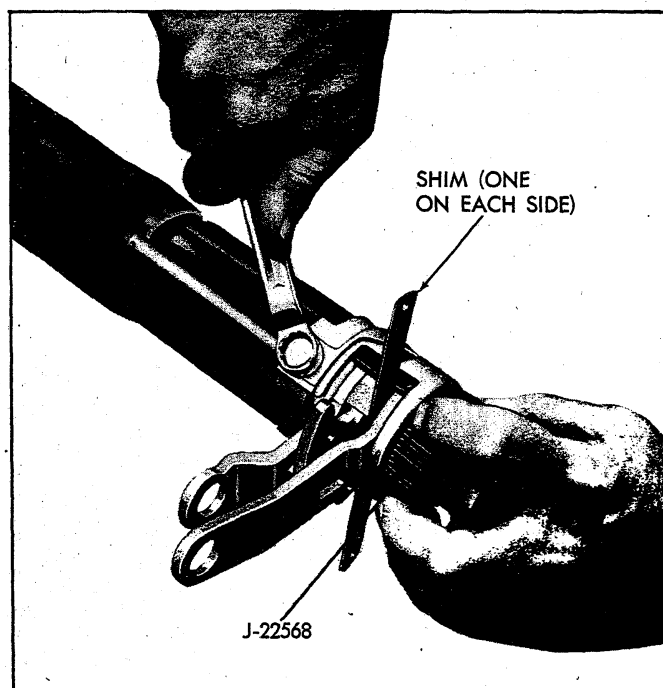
Bottoming Shift Levers Using Spanner Wrench J-22568
